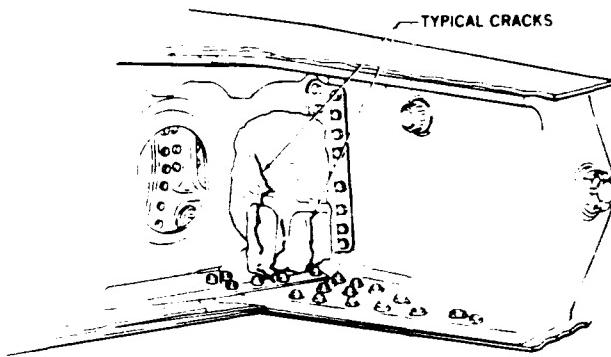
CRACKING OF MAIN LANDING GEAR ATTACH FORGING
